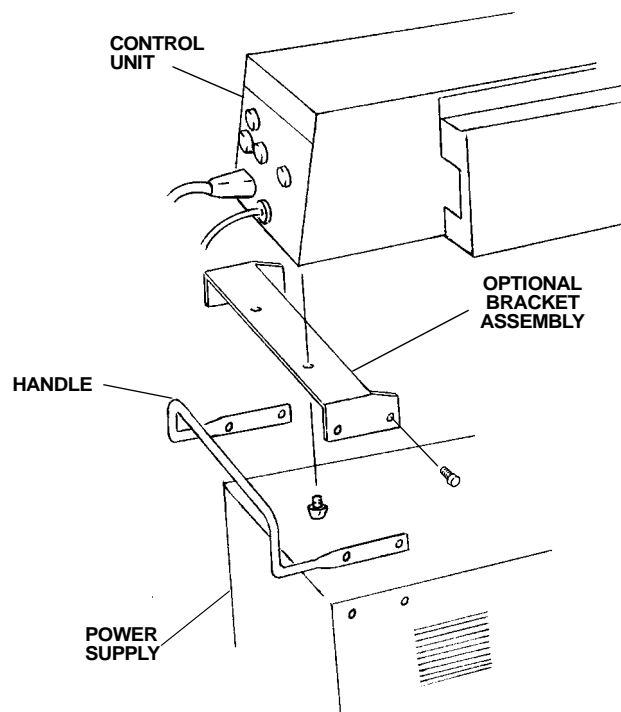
HANDLE/BRACKET INSTALLATION
